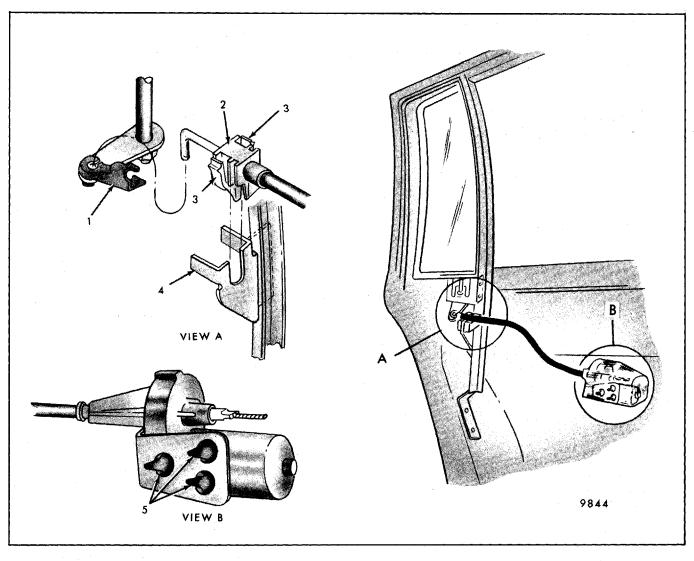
Rear Door Vent Window Actuator Assembly Installation - A-35 Styles with Electric Option
